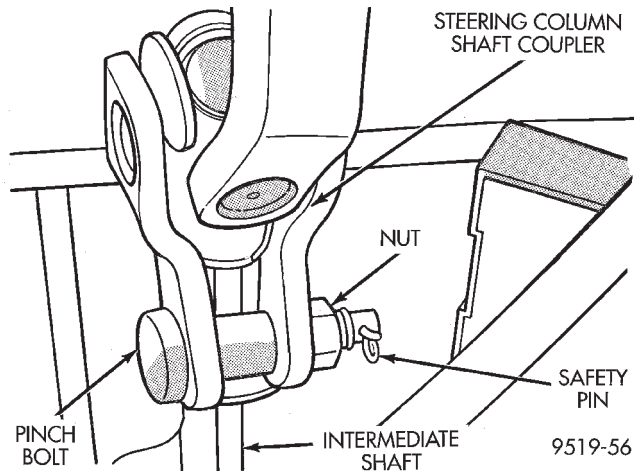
Steering Column Shaft To Intermediate Shaft Attachment
